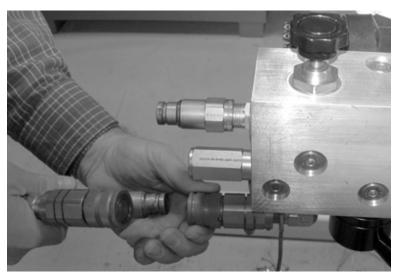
Disconnect hydraulic power by removing the hydraulic hoses from the fittings on the manifold.
